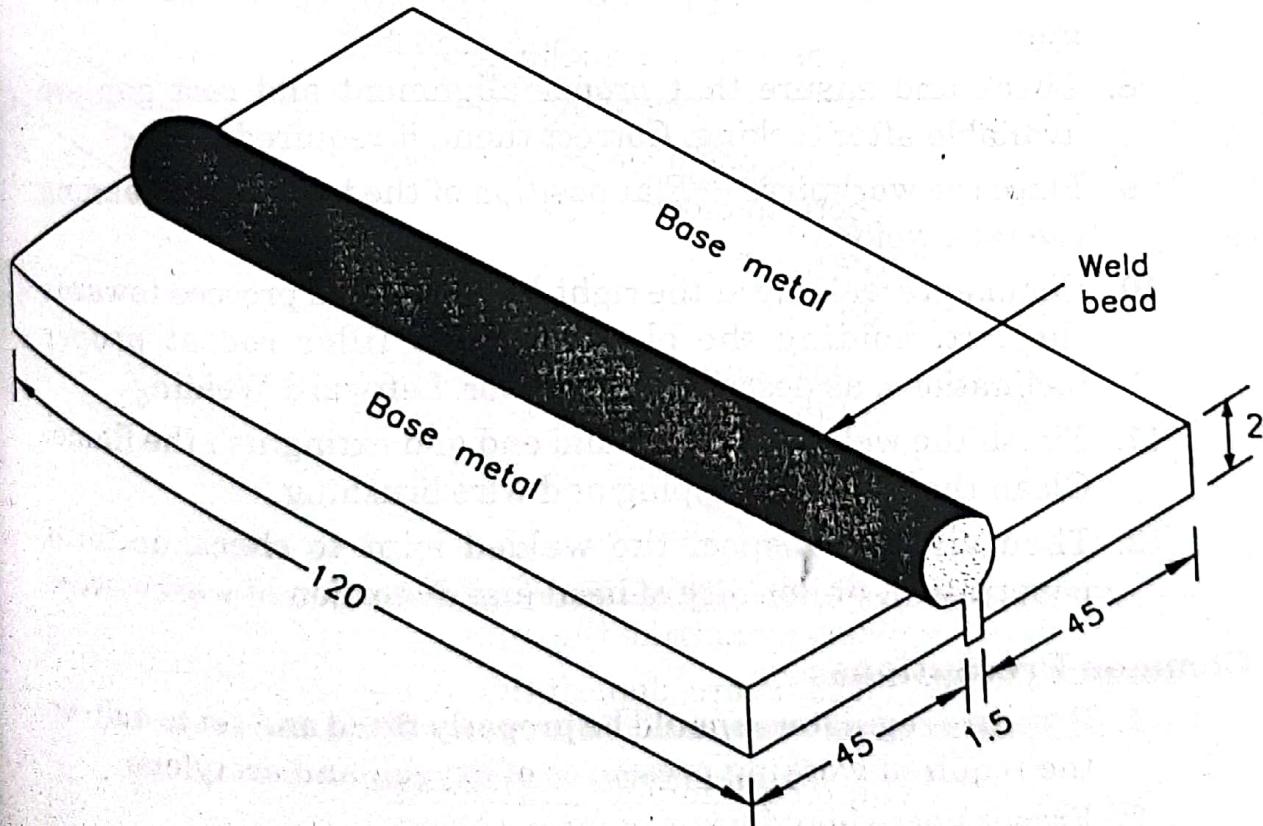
A Square Butt Joint in Gas Welding in Flat Position.
